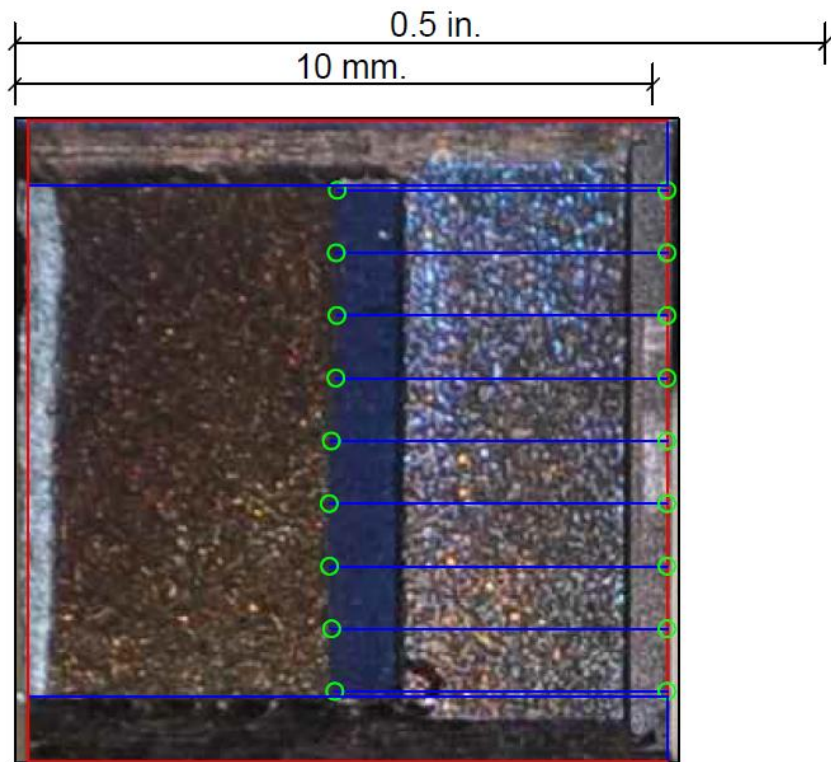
Specimen E24' Fracture Surface
